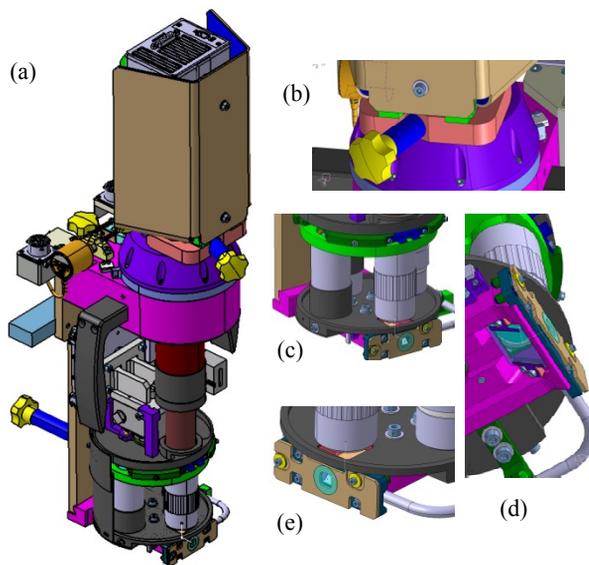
Revolver X-Ray Camera. (a) Complete system coupled to the PCO 4000. (b) Camera rotation stage. (c) Cylinder with four objectives mounted. (d) Support of 45° glassy carbon mirror. (e) Scintillator support, inert gas entrance tube and lead glass emplacement.
